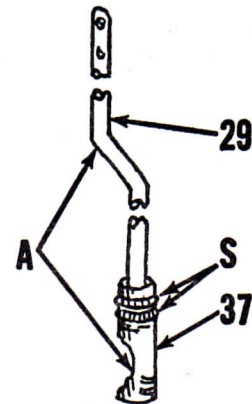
Schematic view of shift rod and shift cam used on models with weedless drive. When assembling, offset portion of shift rod (29) must be aligned with flat of cam (37) as shown at (A). Be sure seals (S) are installed.
